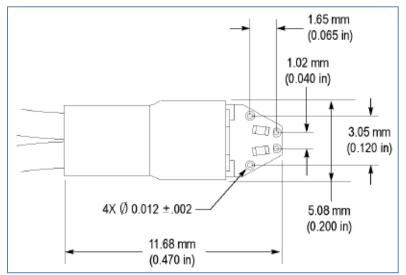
NEX-PRB1-SD Single Channel Serial Probe Dimensions
